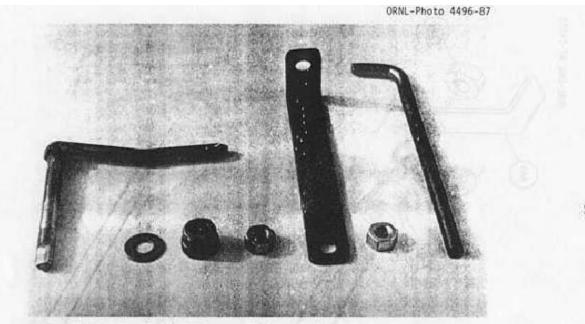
Parts for the shaker assembly. Note the flattened portion of the bolt (at extreme left) which positively locks into the handle (third from right). At the extreme right is a "poker bar" which engages into the hole in the top of the handle to operate the shaker mechanism; the shaker handle will get very hot during normal gasifier operation.
